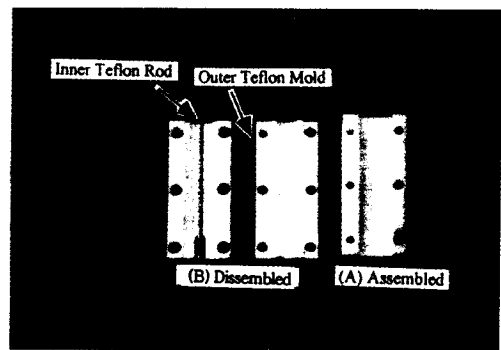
Teflon mold used in this study; (A) assembled and (B) disassembled.
